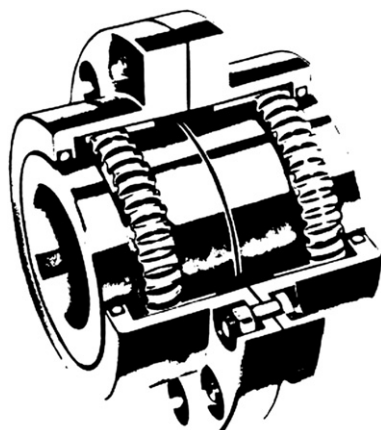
• Gear tooth coupling (grease packed) (Courtesy of Zurn Industries)
